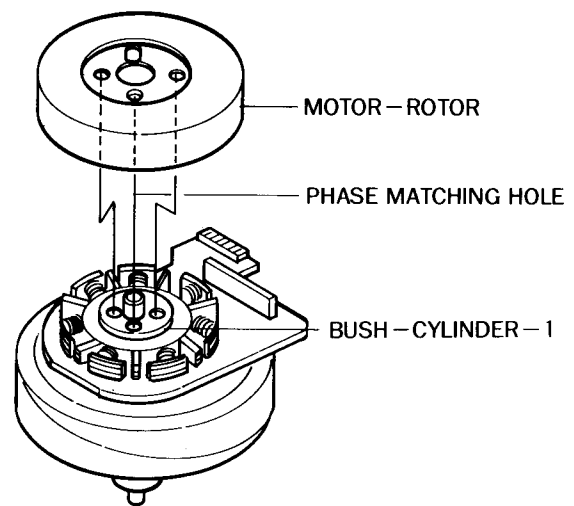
Bush Cylinder -1 & Motor Rotor Timing
